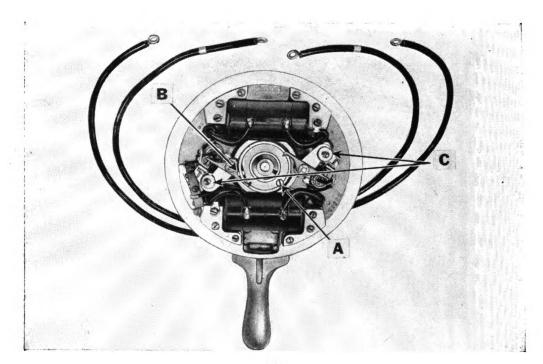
Using screw driver to adjust ignition points to .020 inch.
